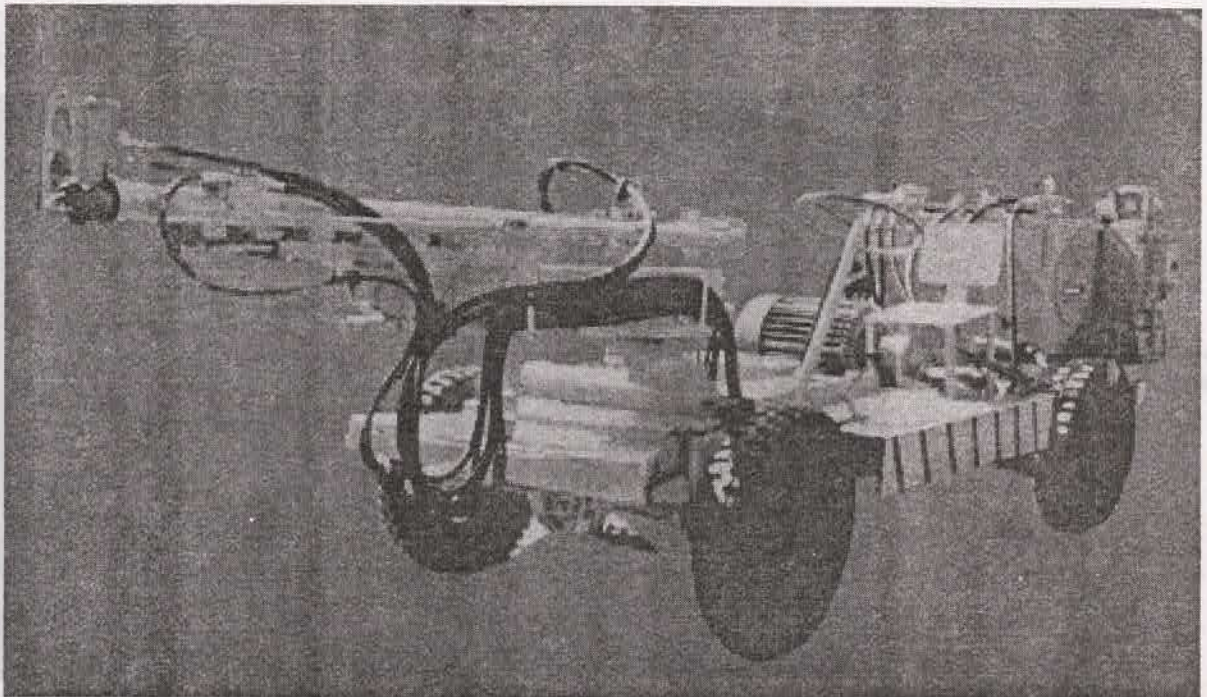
Jeep-chassis mounted mobile drilling machine
